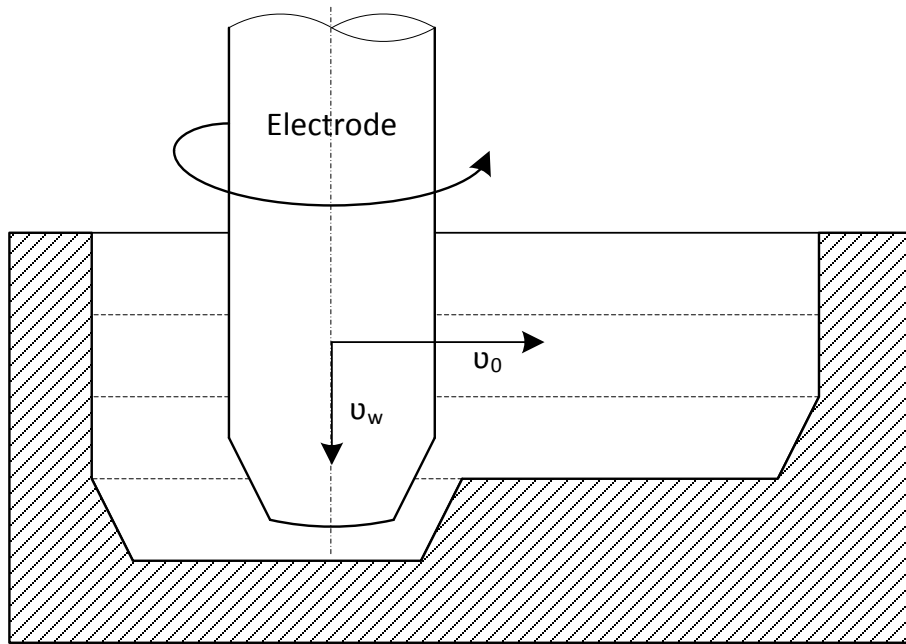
Layer-by-layer machining. The electrode is rotating, the vector of wear compensation and the vector of feed rate in machining are shown.
